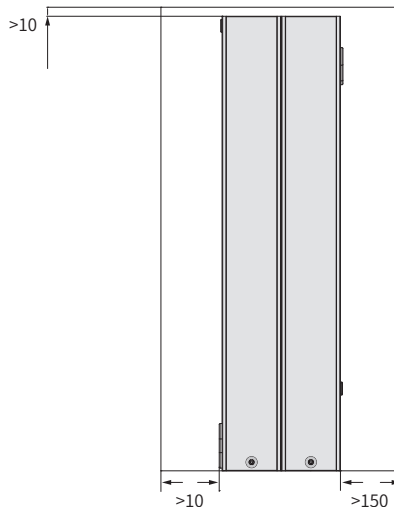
Backplate mounting of two cabinets side by side (unit: mm)
